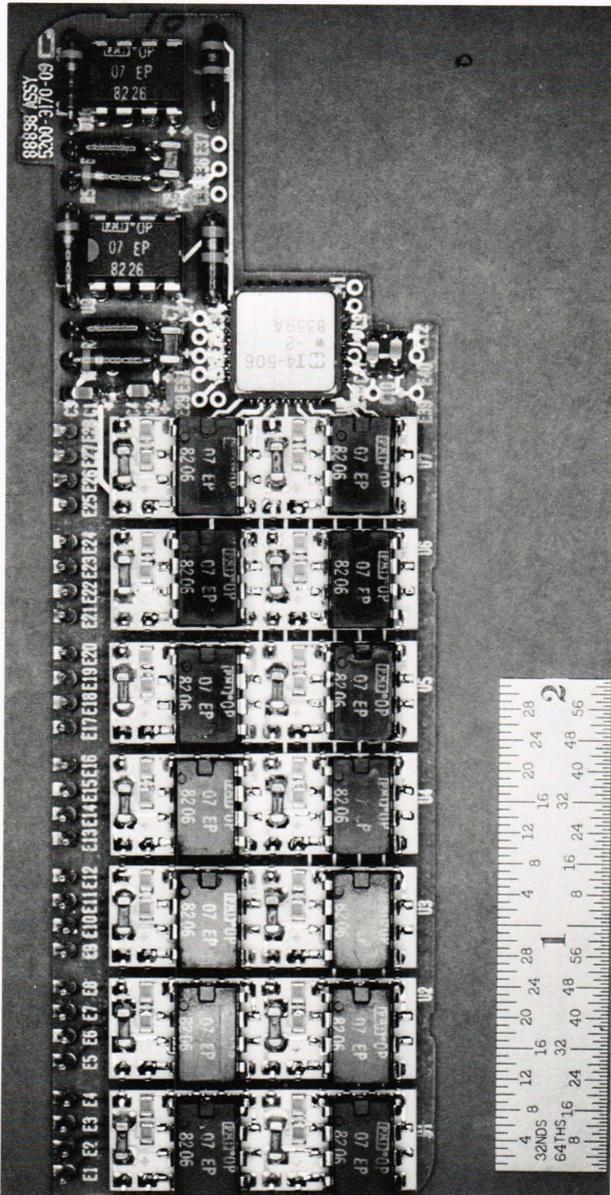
Integral heat sink chip carrier layout on the TOPEX radar altimeter. The TOPEX digital signal processing system will use hundreds of ceramic chip carriers mounted on large ceramic multilevel boards.
